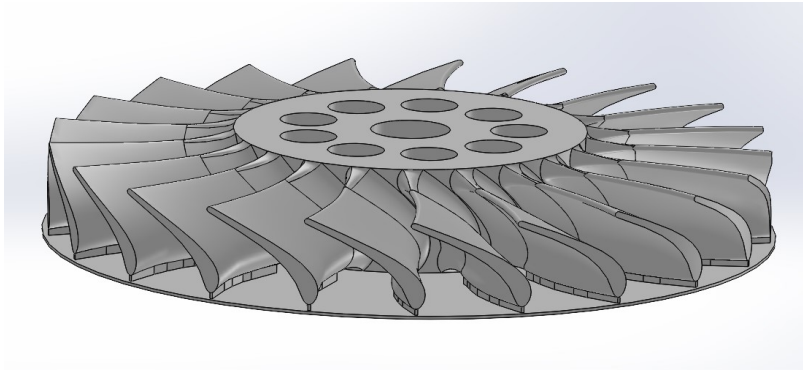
Turbine rotor design with 0.5 mm sacrificial layer.
